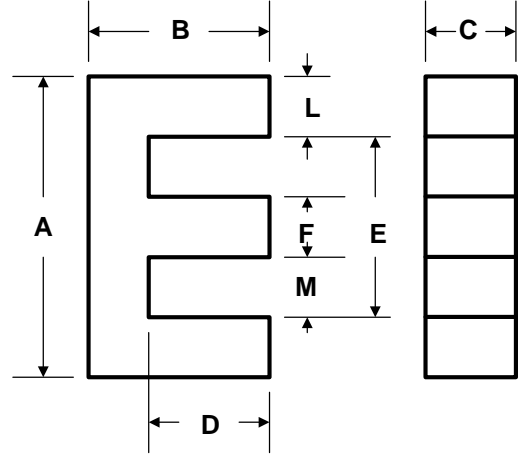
Mechanical drawing of Mag-Inc EE core.
